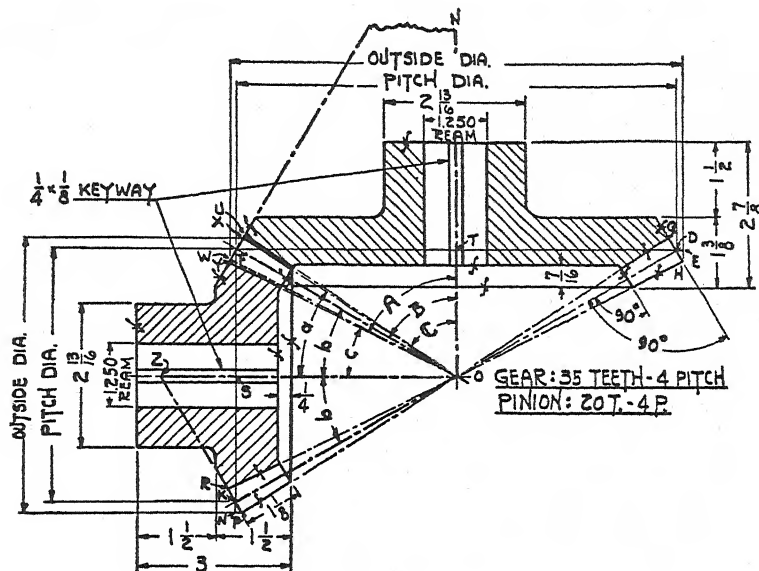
Nomenclature of a Mating Bevel Gear and Pinion.
